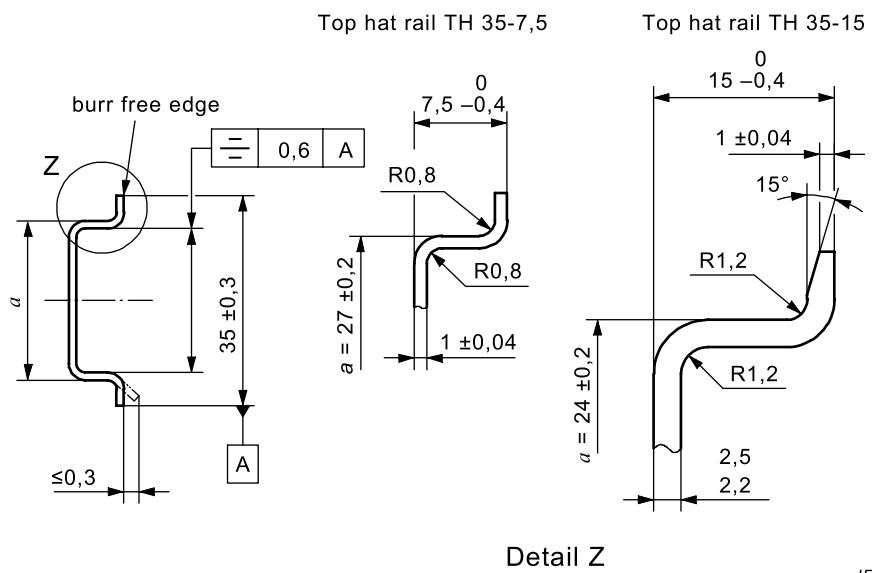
Top hat rails 35 mm wide for snap-on mounting of equipment
